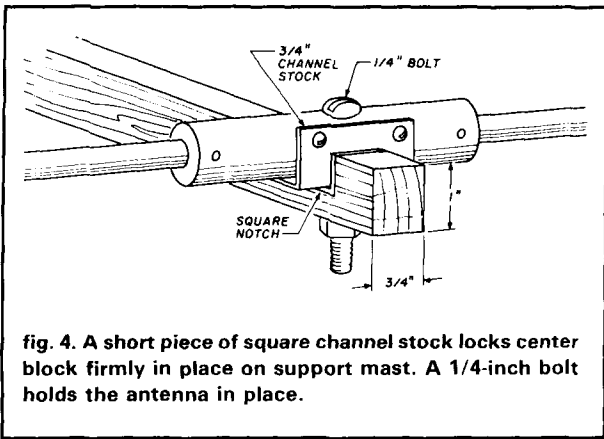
A short piece of square channel stock locks center block firmly in place on support mast. A 1/4-inch bolt holds the antenna in place.
